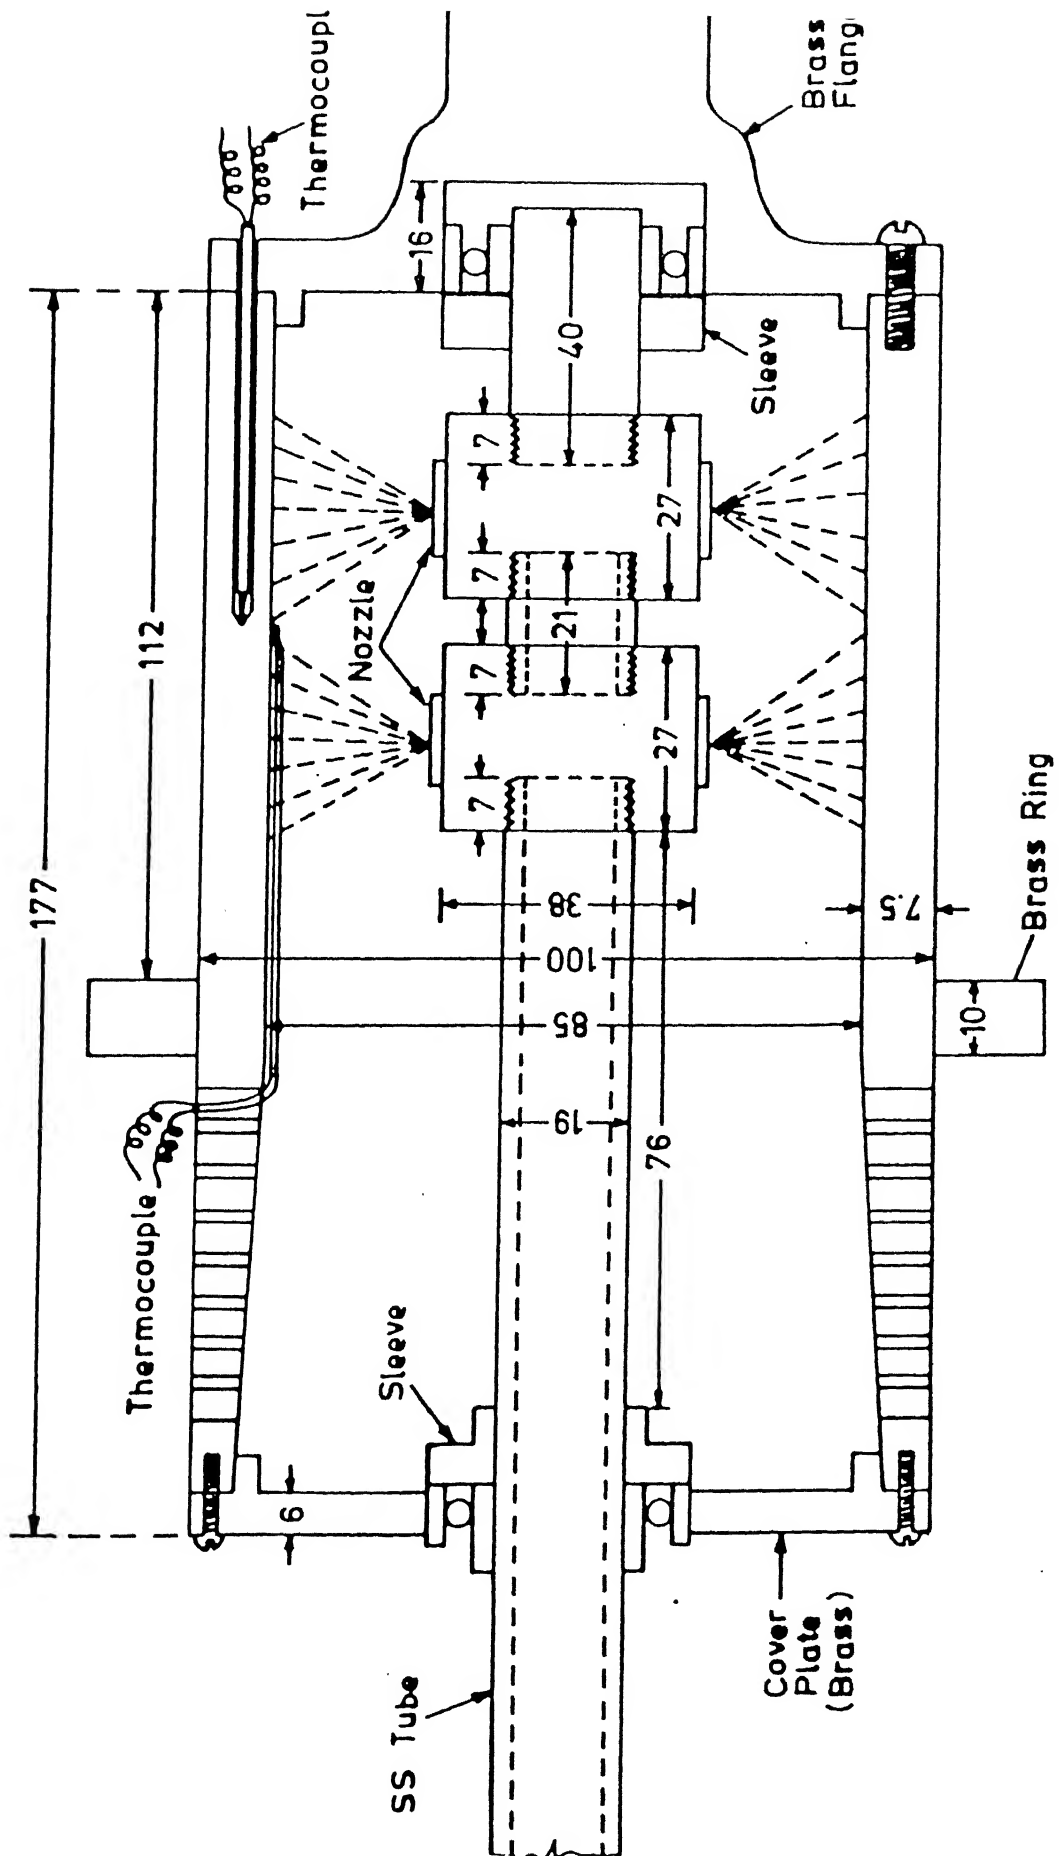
Schematic diagram of Strip Caster assembly [10]
